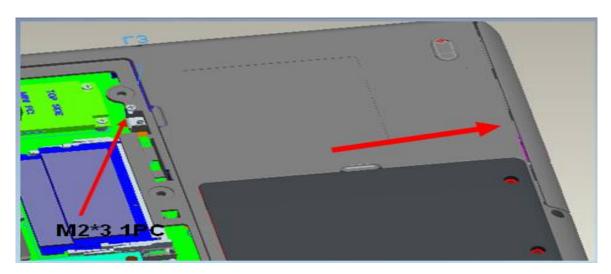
Remove the screw on ODD Bezel and ODD
